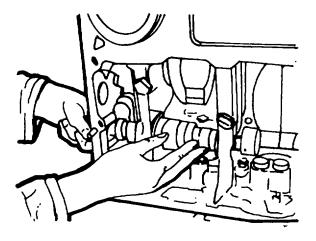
Installing Camshaft in Bearing Bores (Engine Block Upside-down)
